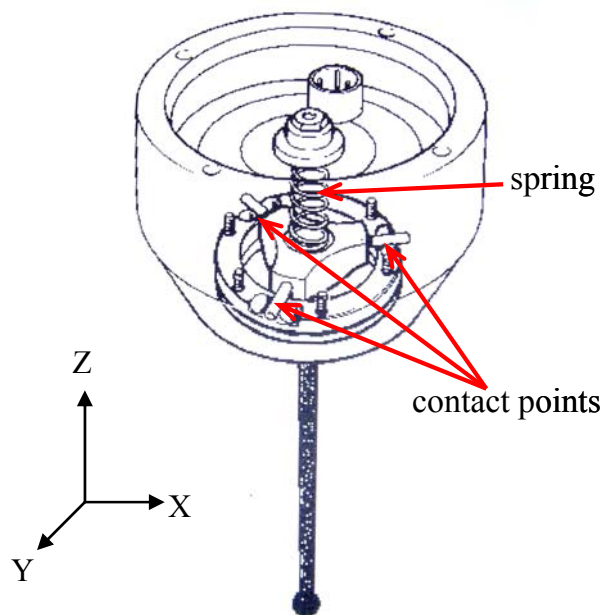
On-machine probe sensor mechanism. ([www.renishaw.com](http://www.renishaw.com))
